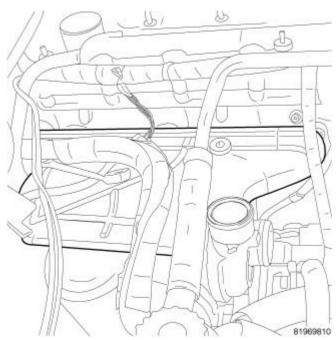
Exhaust Manifold Heat Shield Courtesy of CHRYSLER LLC
